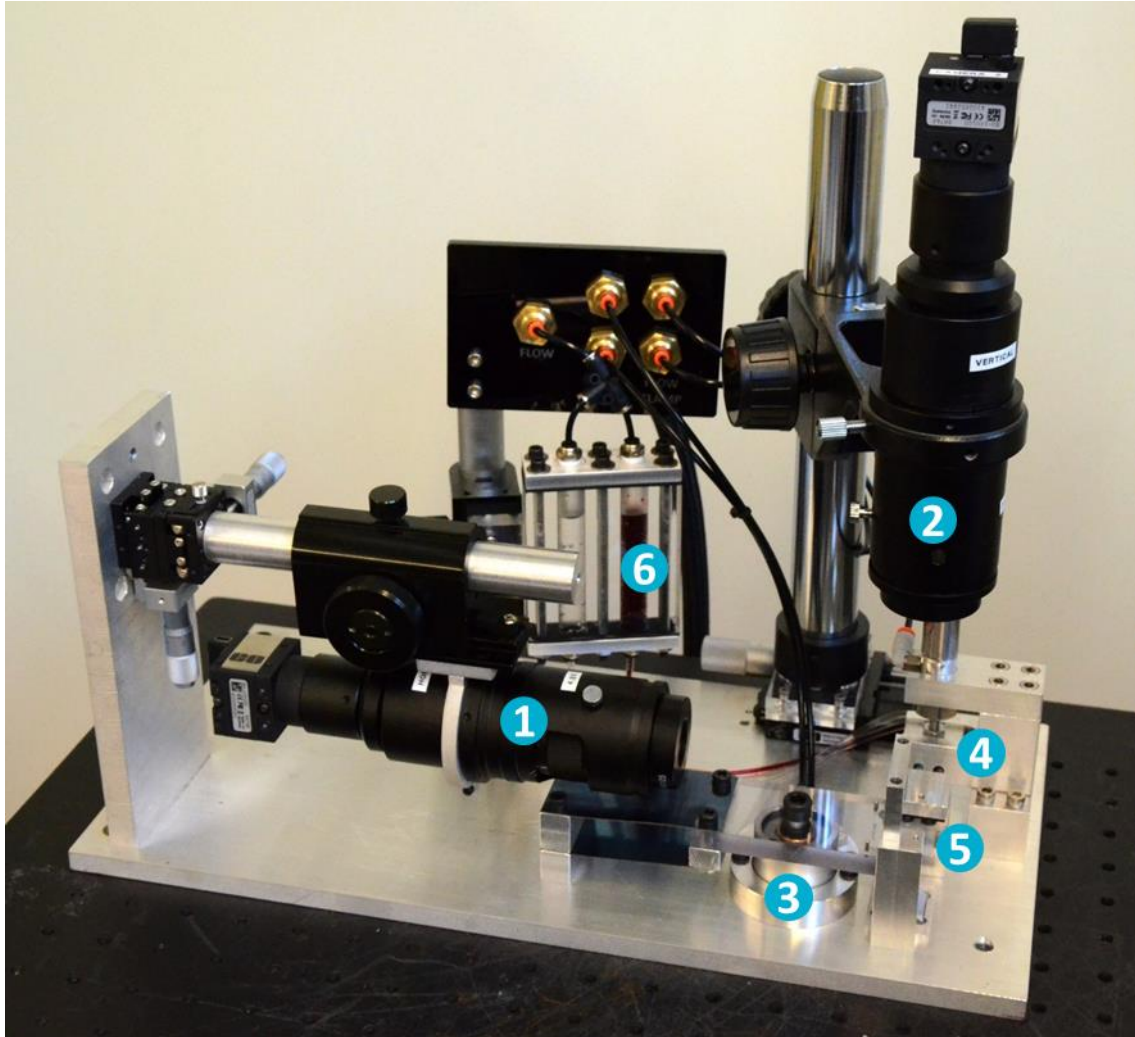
The final functional testing machine. (1) Higher magnification optics with USB microscope camera for channel width measurement, (2) lower magnification optics with USB microscope camera for mixing location measurement, (3) air cylinder for chip clamp, (4) air cylinder for flow clamp, (5) dye outlets, (6) and dye reservoir.
